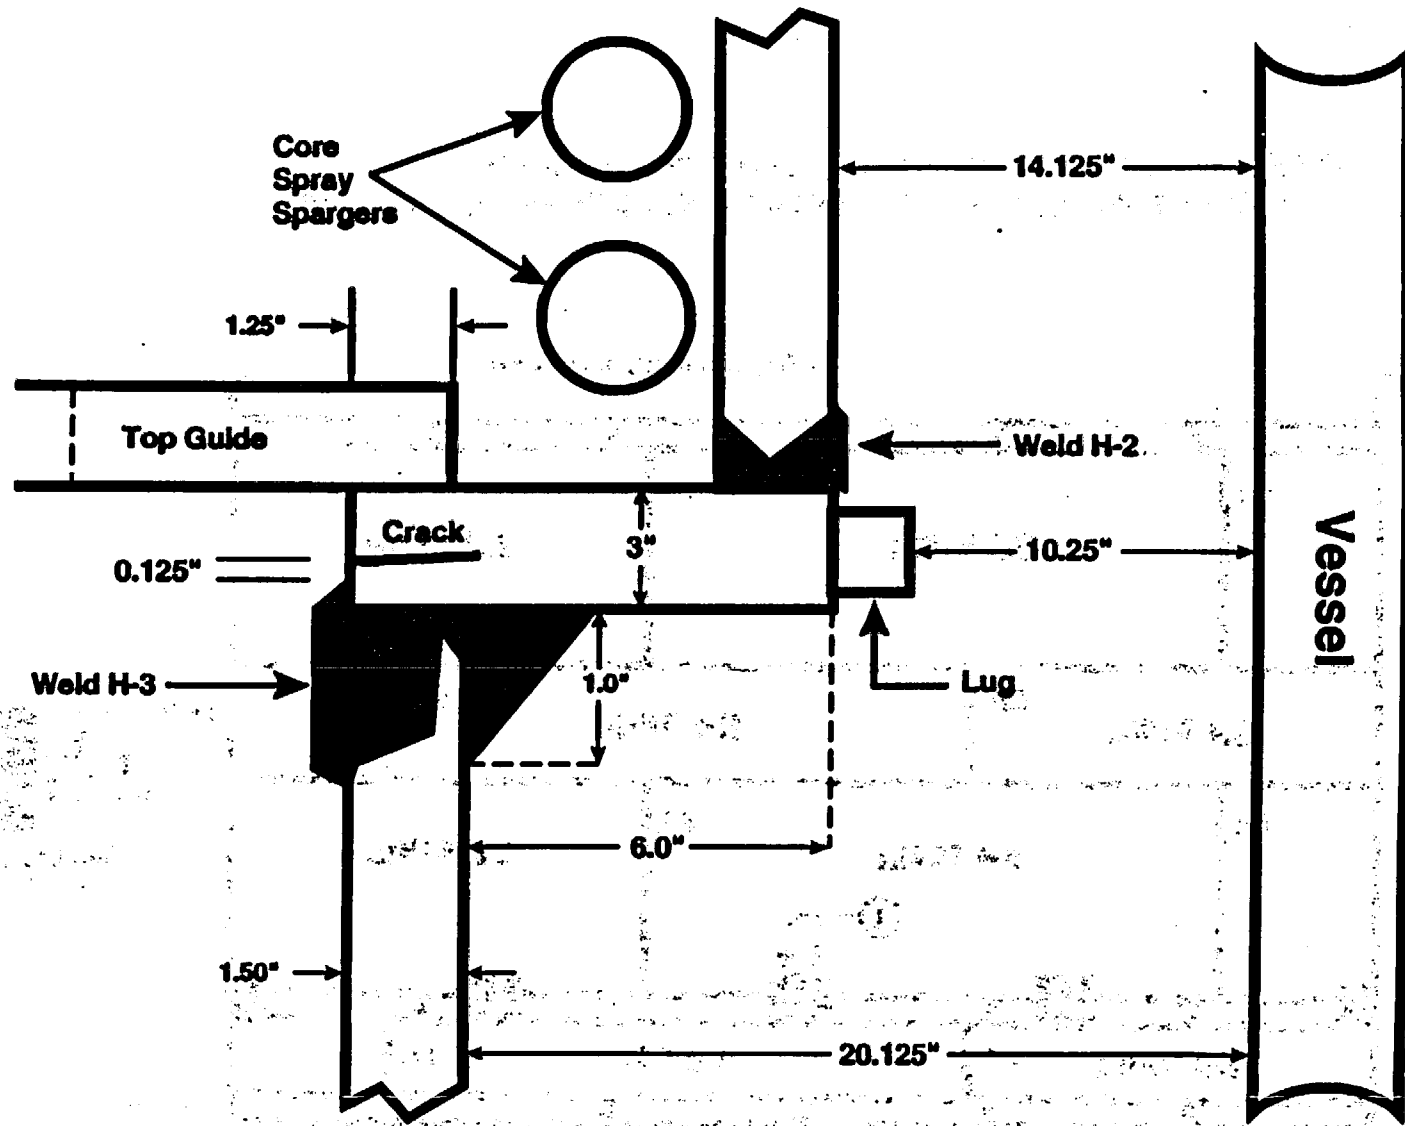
Details of Weld Locations H-2 and H-3 in the Brunswick Unit 1 Core Shroud (From CP&L)
